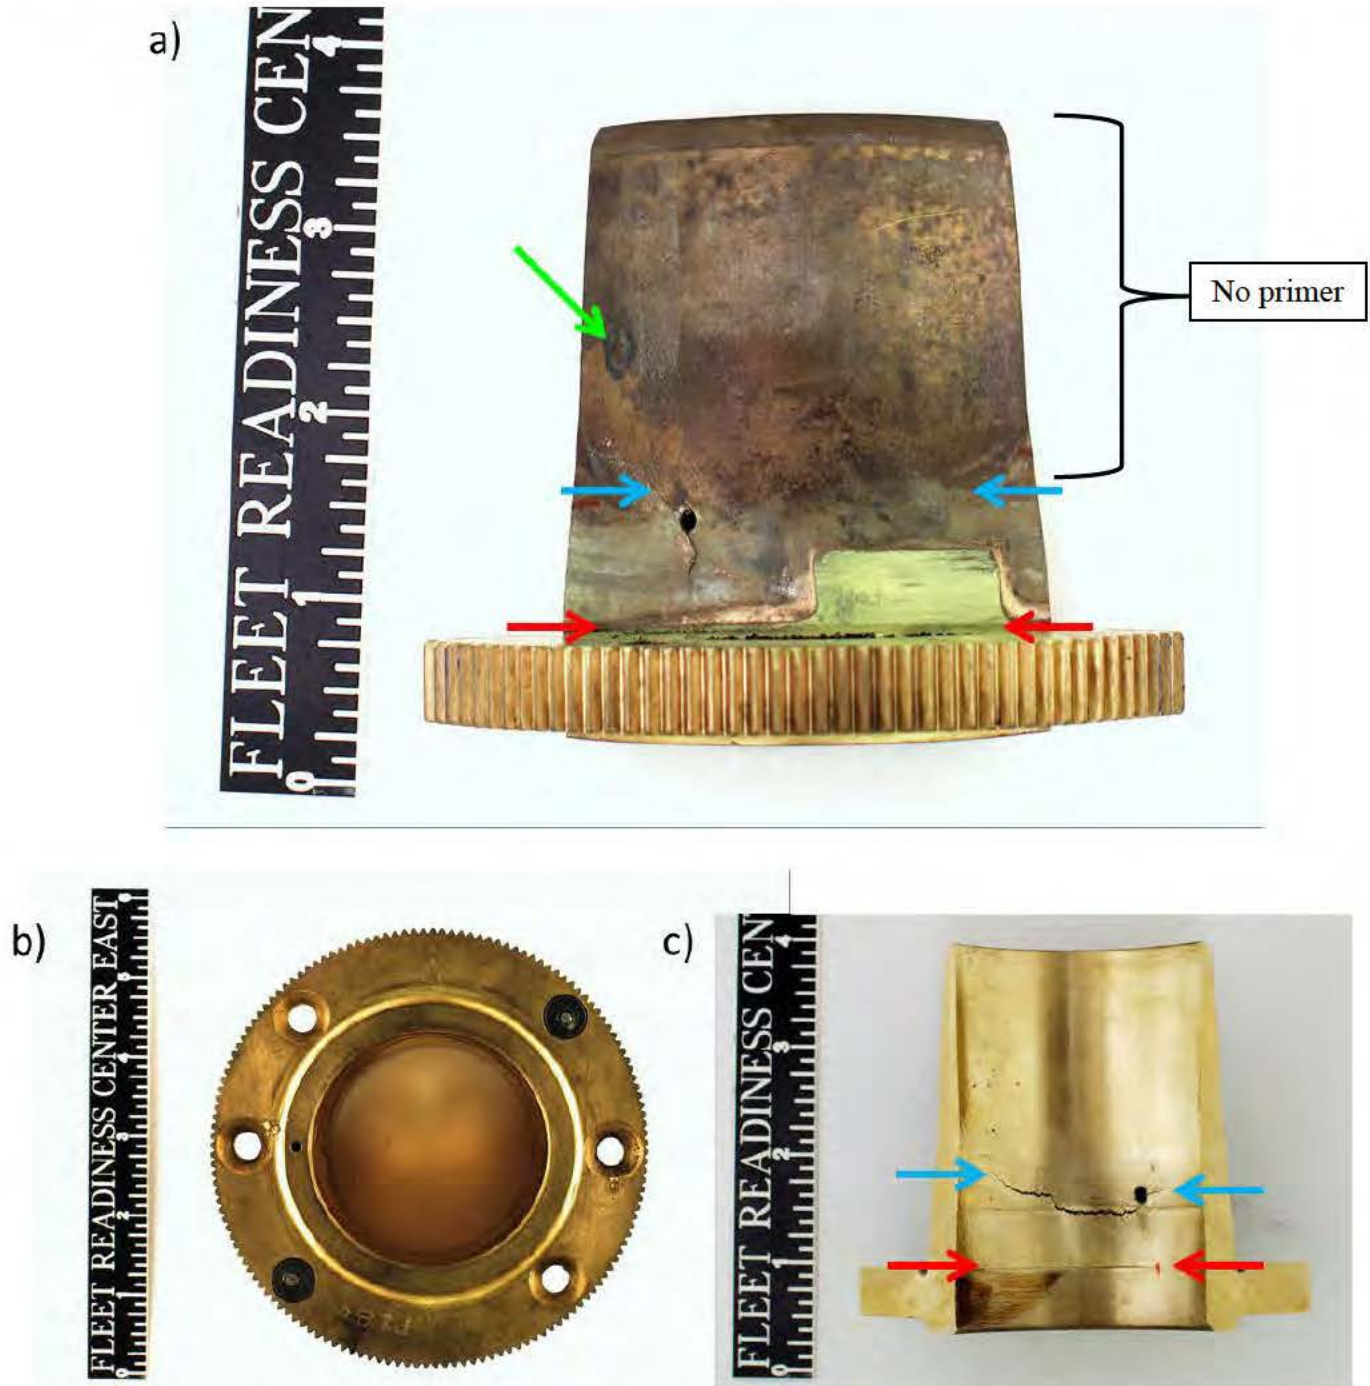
P2B4 Blade Bushing; a) View from side showing crack locations; b) View looking outboard; c) Looking at ID of cracked section. Green arrow indicated lead flake. Blue arrows bracket outboard crack and red arrows bracket inboard crack.
